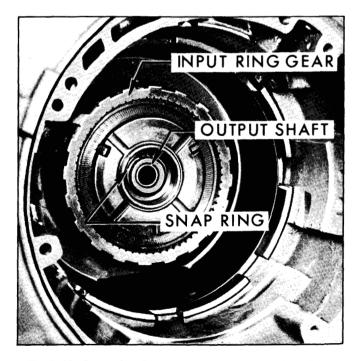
Removing Output Carrier to Output Snap Ring
